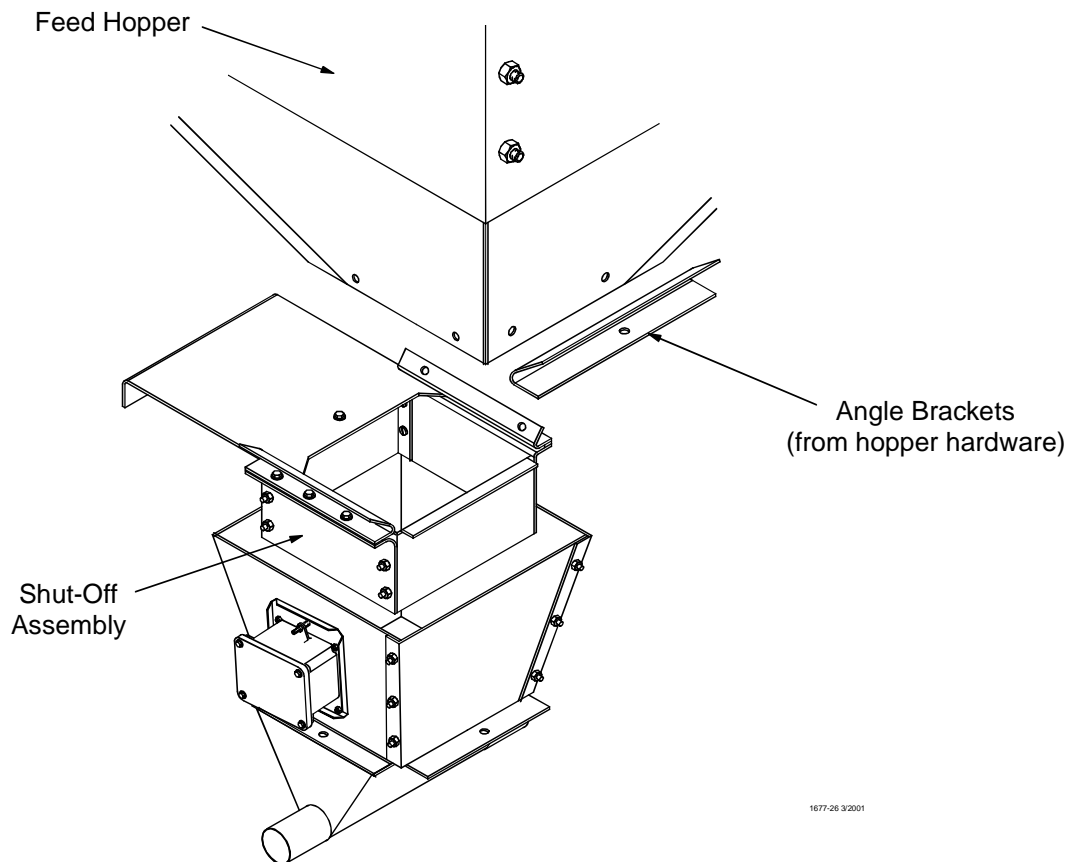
Installing the Shut-Off Gate Assembly to the Feed Hopper
